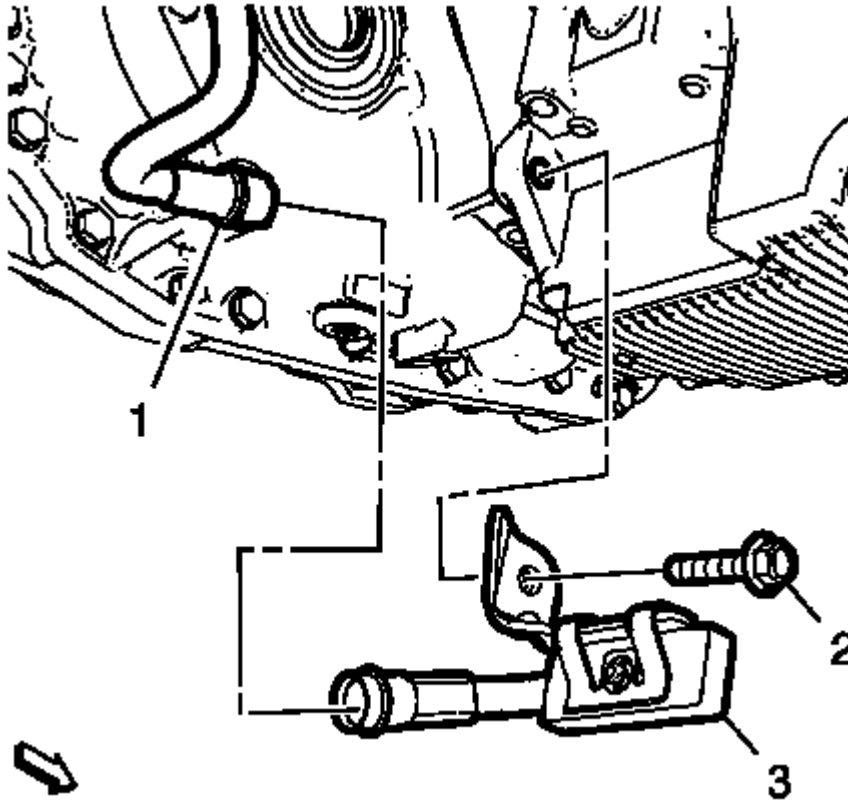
Engine Oil Heater Power Cable Plug And Engine Oil Heater
